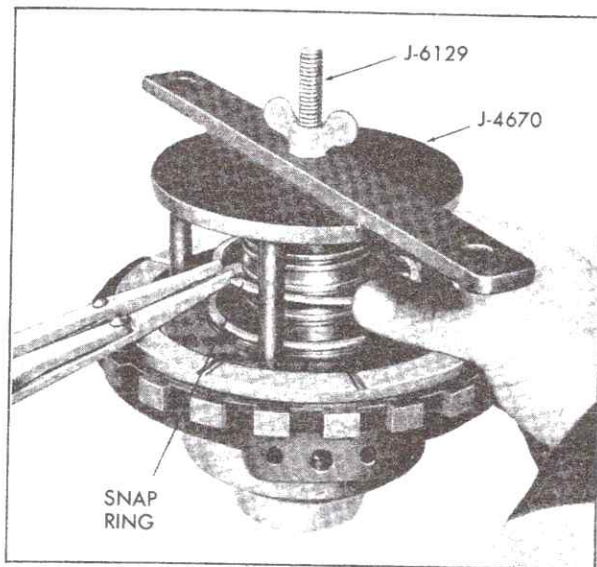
Removing and Installing Intermediate Clutch Piston Snap Rings
